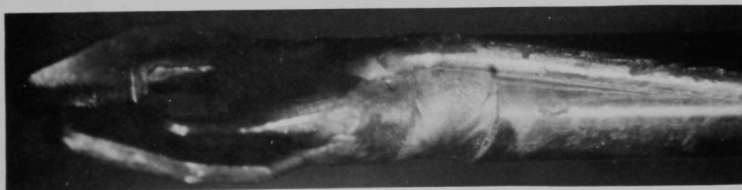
Lack of Fill Weld on Element E47 at 90° Clockwise from View in Fig. 7. ANL Neg. No. ID-103-L5101.
